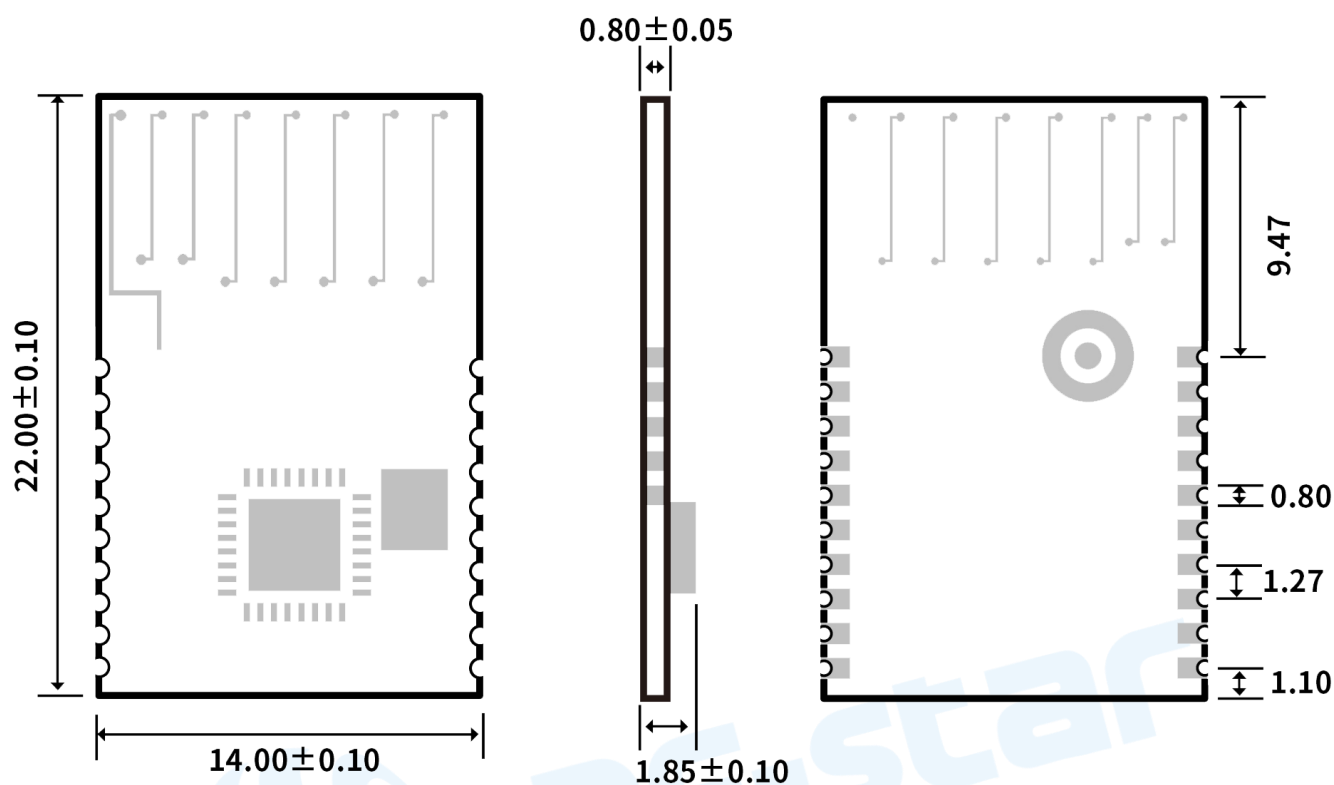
Recommended PCB Footprint of RF-SM-1044B4 (mm)
